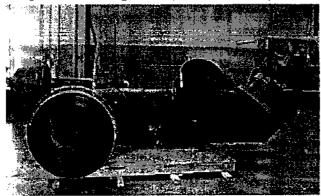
Fused Manifold Assembly with Flange Adapters and Back Up Rings
